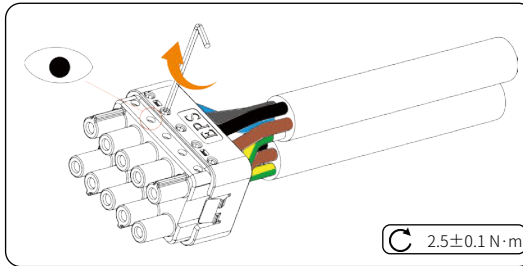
Inserting the EPS cable into the rubber core and tightening
